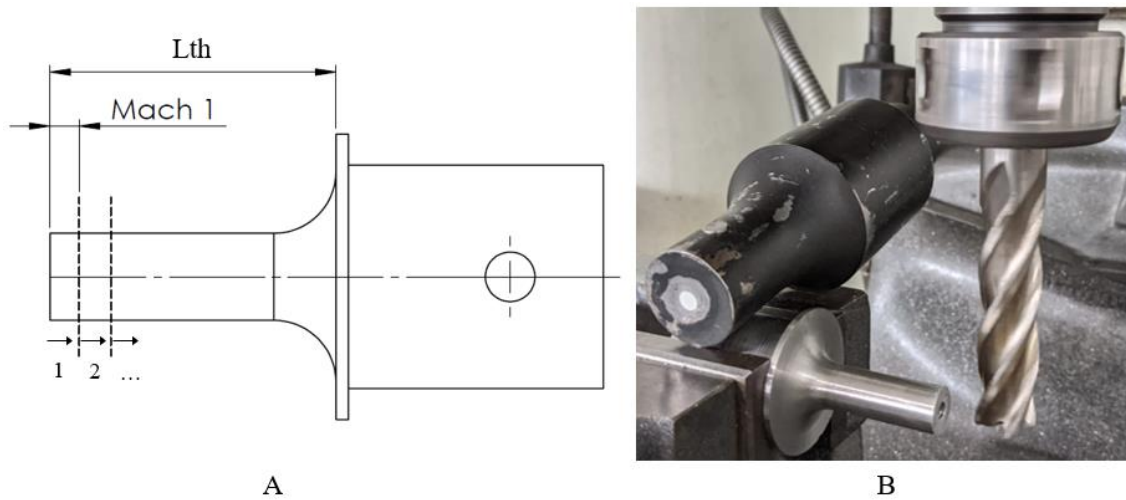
(A) Mach sequence representation; (B) pure torsional setup (LH, pin, and TH) fixed on milling machine.
